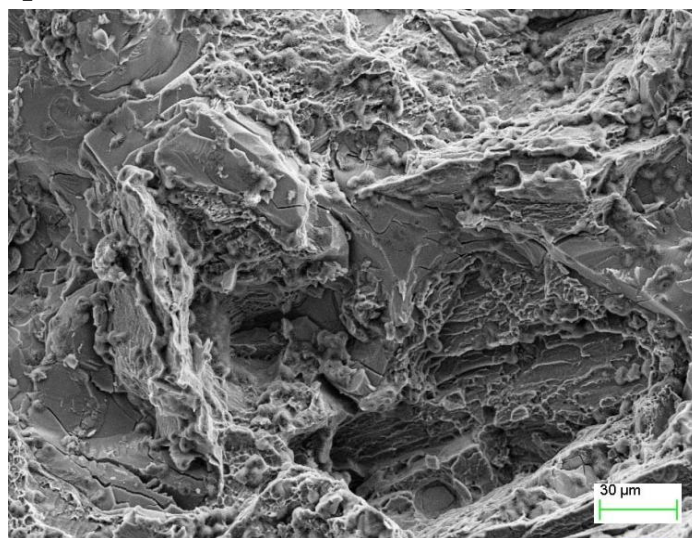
SEM image of tensile fractured of FSW sample in tool speed at 1000 rpm
